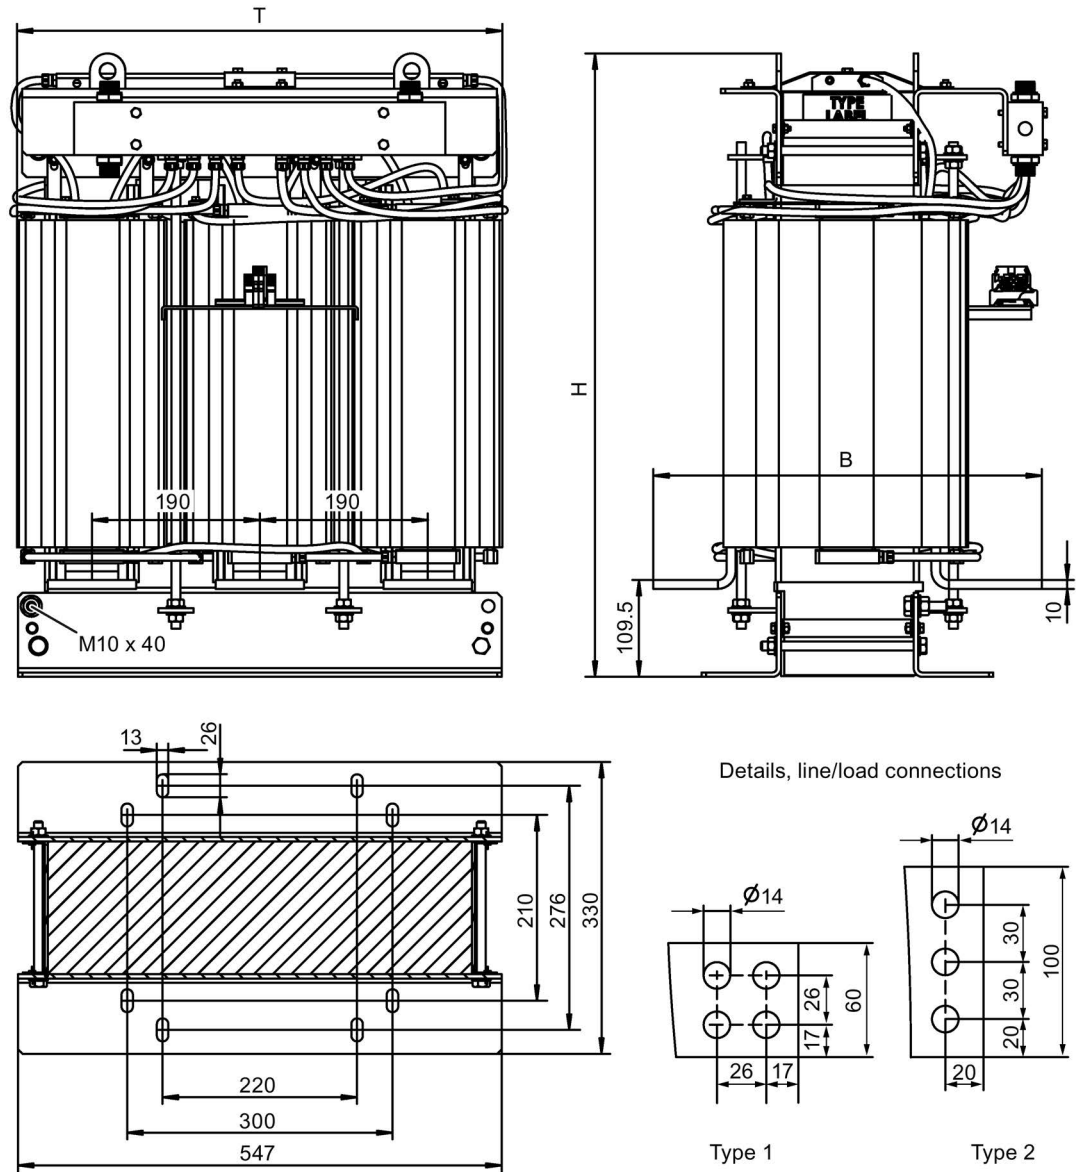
Dimension drawing, filter reactor frame size JIL
